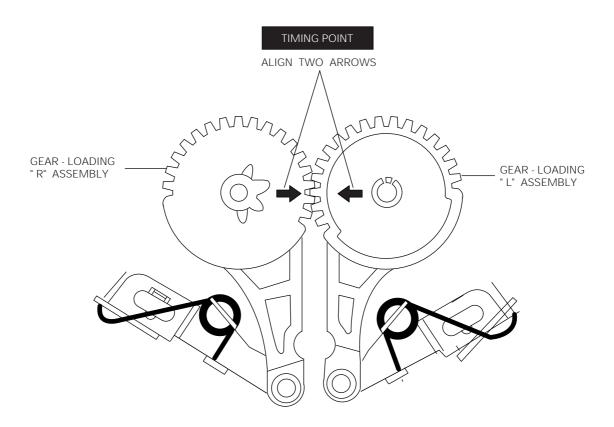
Assembly of Gear Loading "L", "R" Ass'y
